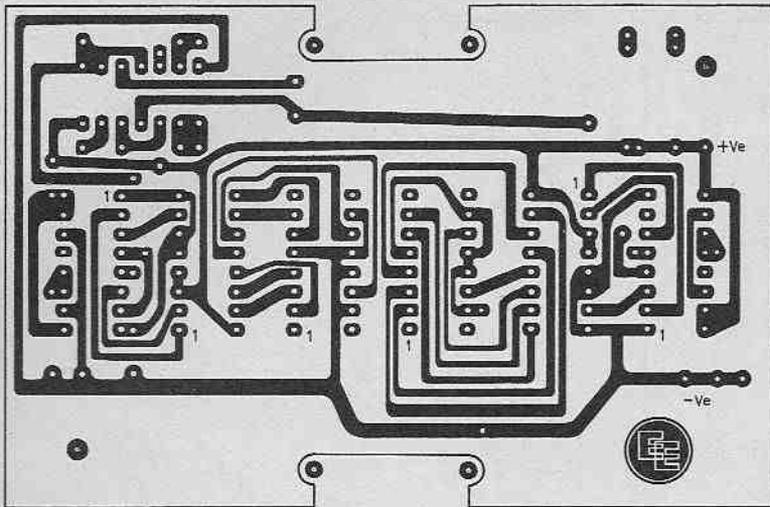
Full size printed circuit board master pattern. The black areas are the regions of copper to remain after etching.
